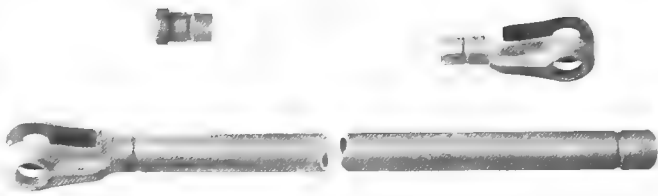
National Cylinder Push Rod Jaw and Tip.
